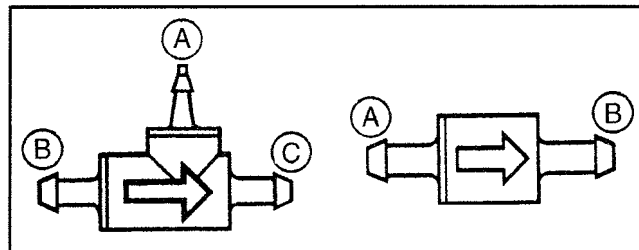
Simple line drawing of the in-line check valve used on 90° looper outboards. Pictured on the left is a valve from a V4 power powerhead through 1996 and all V8 powerheads, while the valve used on 1997 and later V4 powerheads, as well as all V6 motors is on the right. The text makes reference to the letters called out on the drawings.
